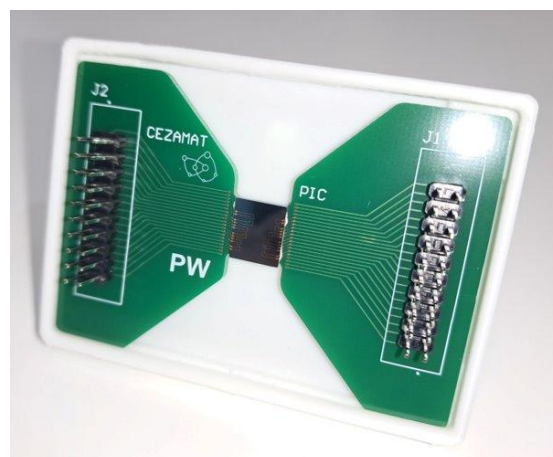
Photonic integrated circuit mounted on a dedicated printed circuit board.
